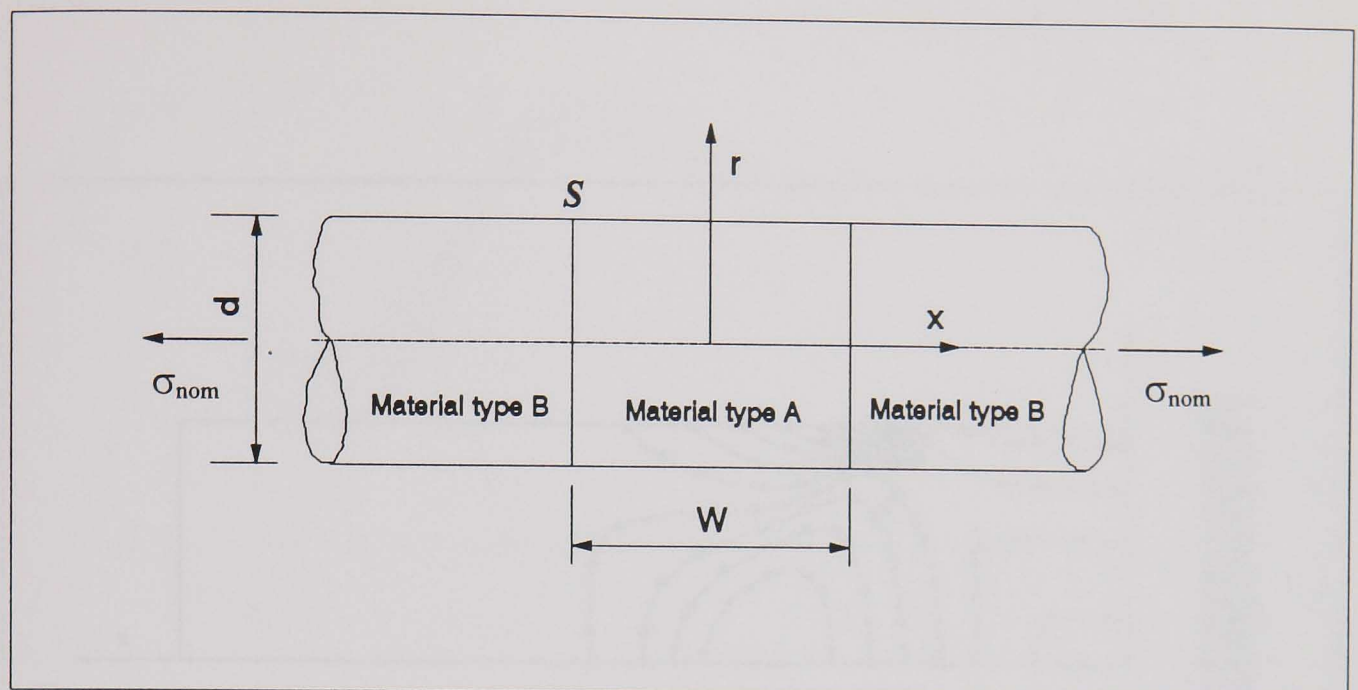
Idealised cross-weld specimen.
